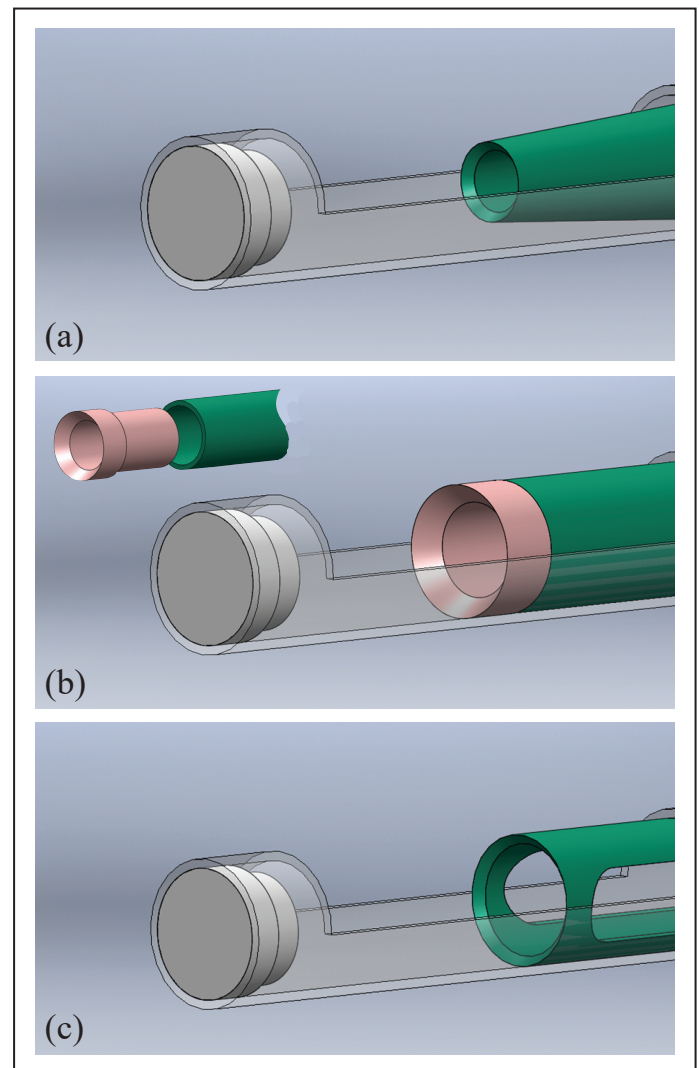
The three most promising conceptual solutions. (a) Conical shaft storage (b) Variable inner shaft diameter storage (c) Extruded hole storage
